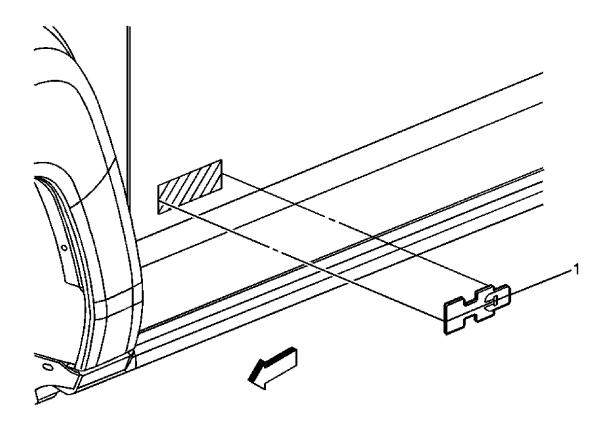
View Of Door Emblem & Nameplate Courtesy of GENERAL MOTORS CORP.
